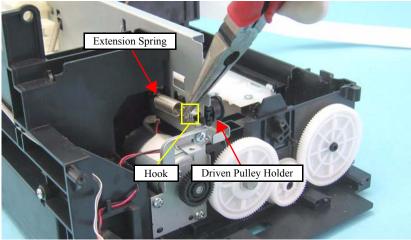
Removing Extension Spring and Driven Pulley Holder
